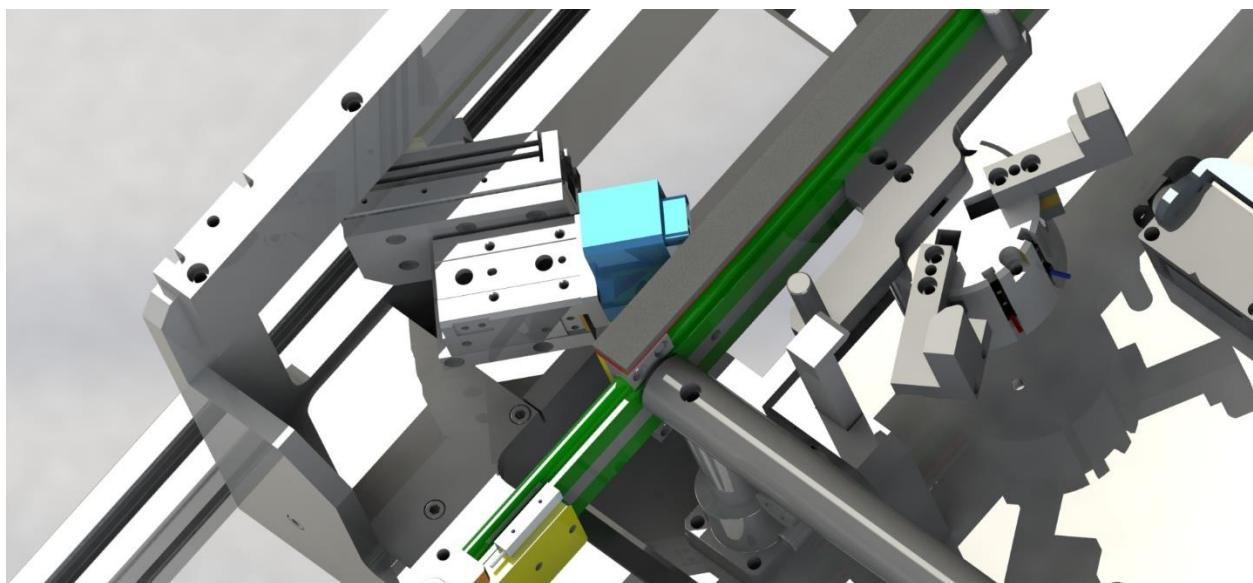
Another view of the ejection system between a connector fixture and a part fixture
